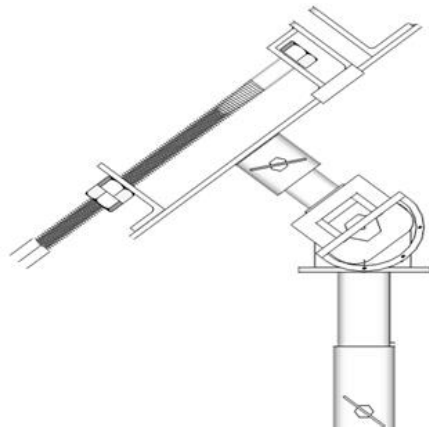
The Pictorial drawing of the Apparatus in a 45-degree of head
